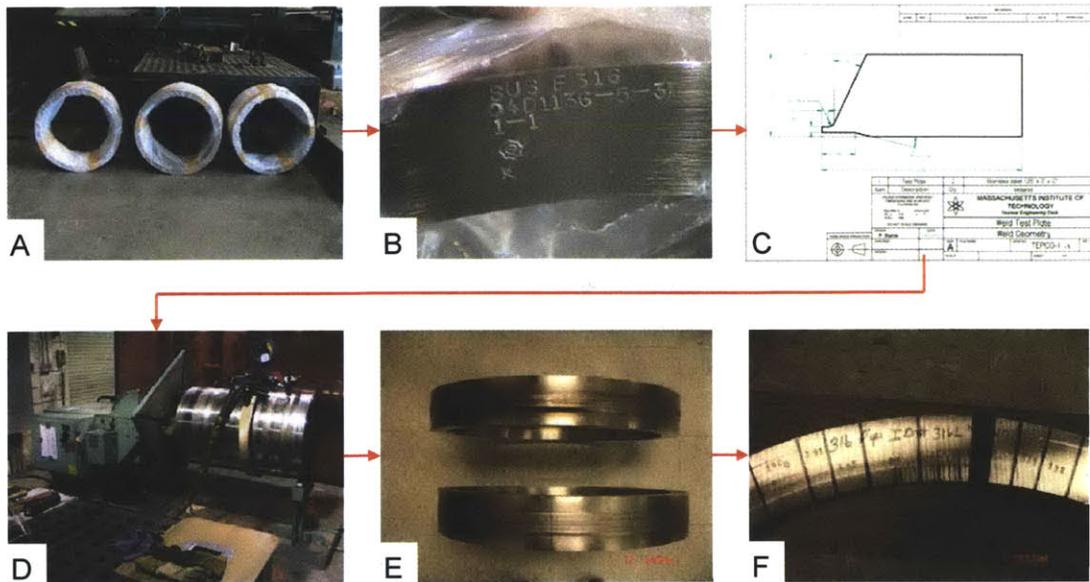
Weld construction process: A) forged pipe rings, B) rings stamped, C) diagram for cut in rings in preparation for welding, D) orbital welding of rings, E) completed welds, F) welds sectioned into blanks and labeled.
